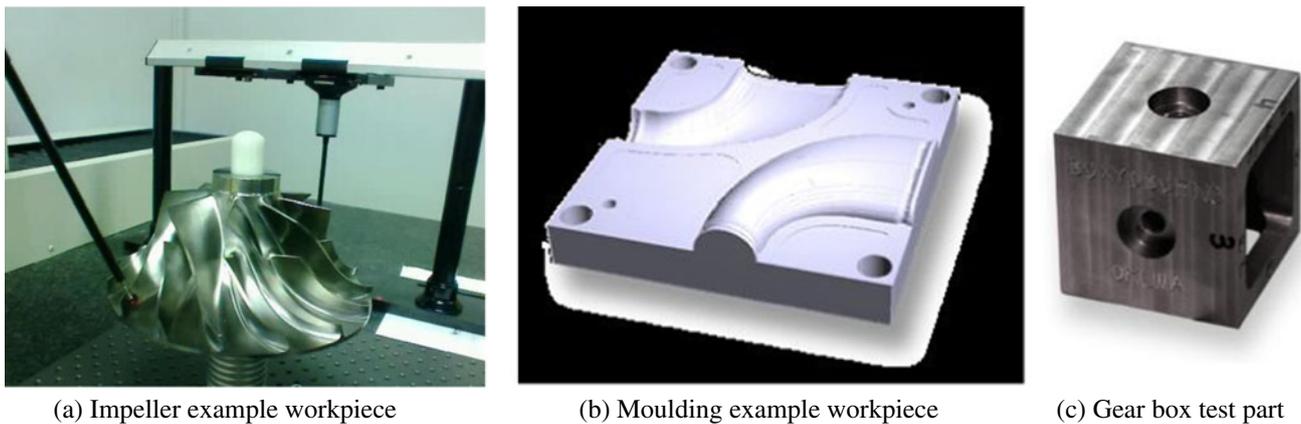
STEP-NC demonstrations of phases four and five. a Impeller example workpiece. b Moulding example workpiece. c Gear box test part
